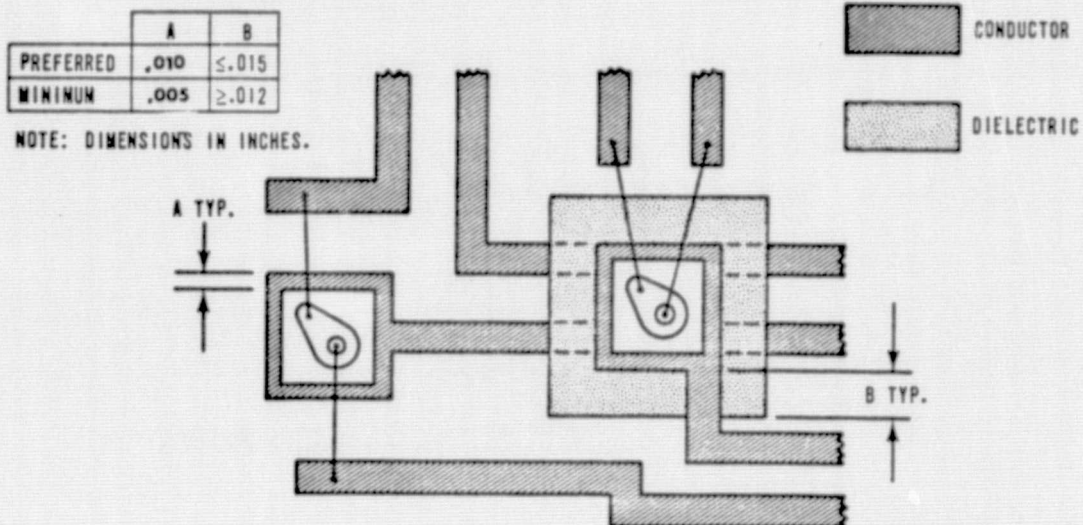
PADS FOR MOUNTING SEMICONDUCTOR CHIPS
